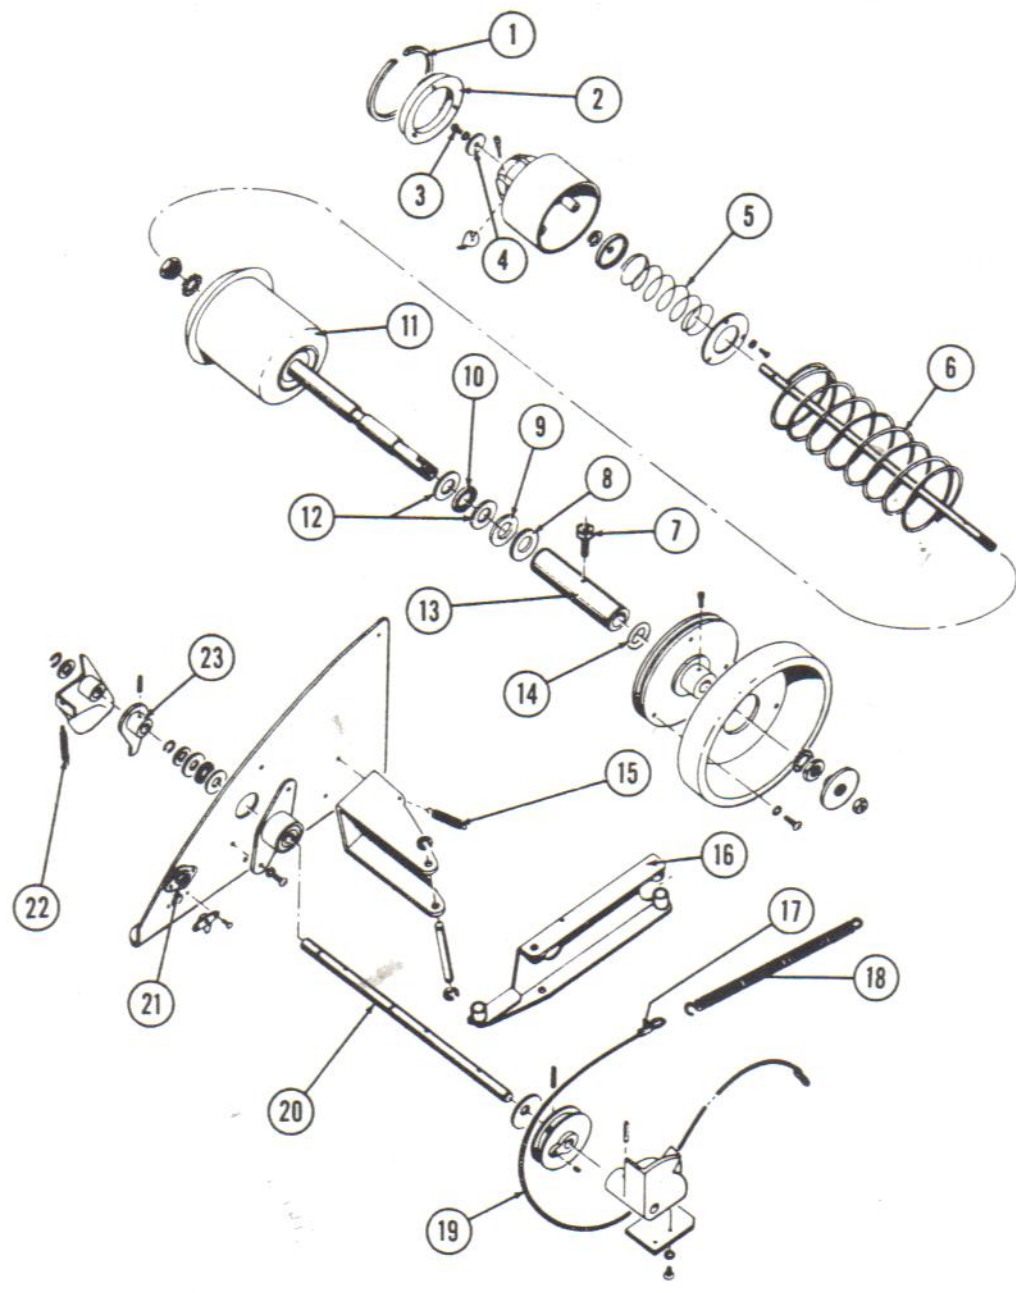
TURNTABLE SHAFT, RECORD CLAMP SHAFT AND MOUNTING PLATE AND SHAFT ASSEMBLY, 2500
